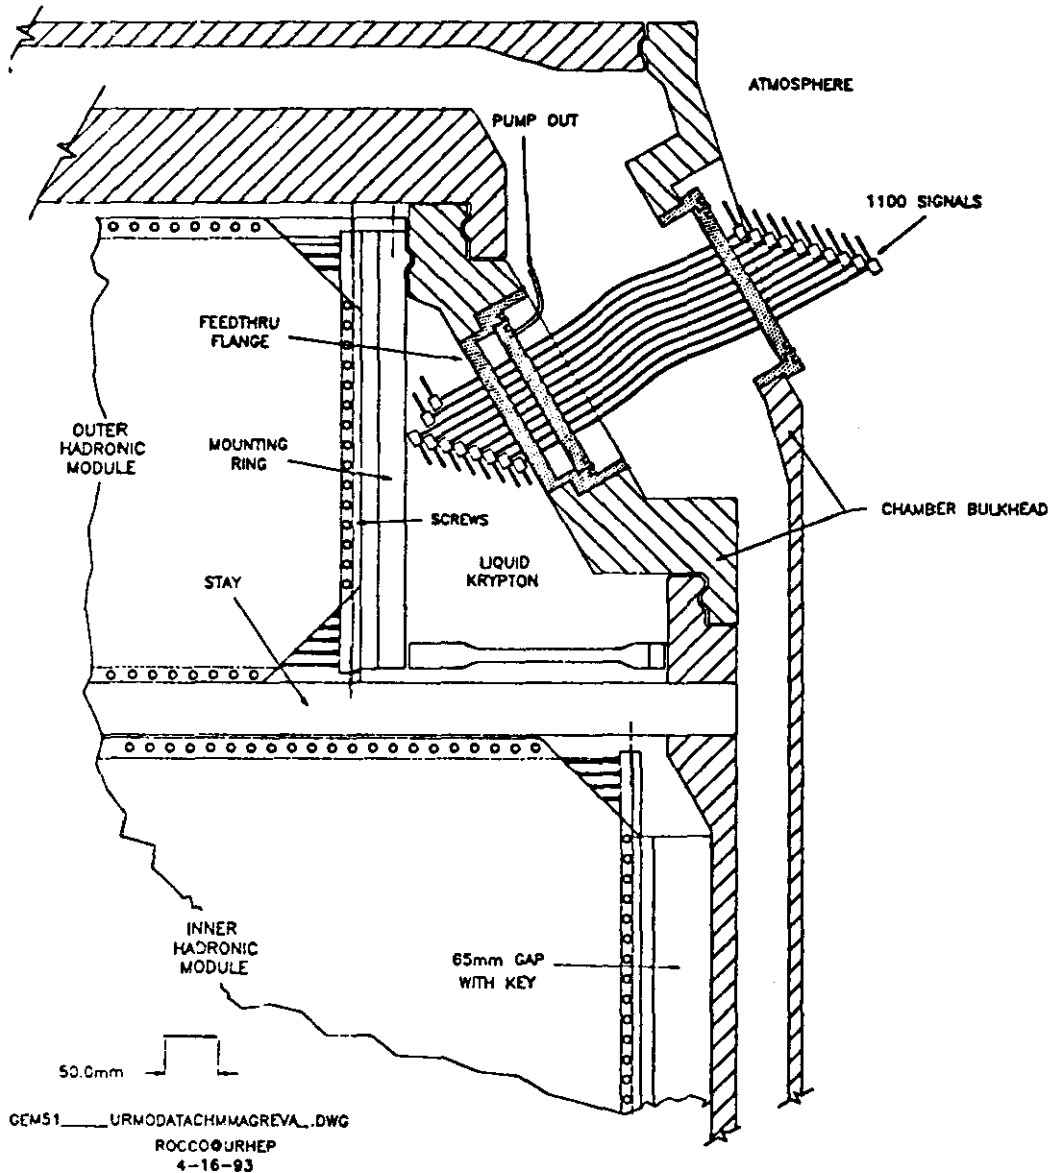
Detail of inner barrel cryostat near the feedthrus, showing the ring on which the outer hadronic modules will be mounted.
